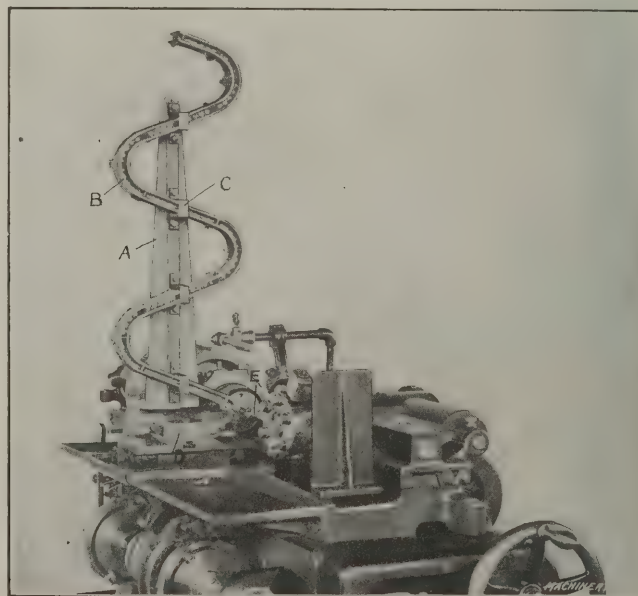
Snake-shaped Attachment for Handling a Shouldered Stud on a No. 0 Brown & Sharpe Automatic Screw Machine
